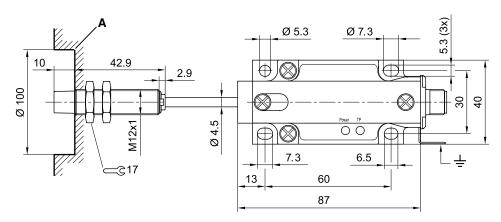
Dimensions for BIS L-409-045-003-07-S4 processor [mm]
